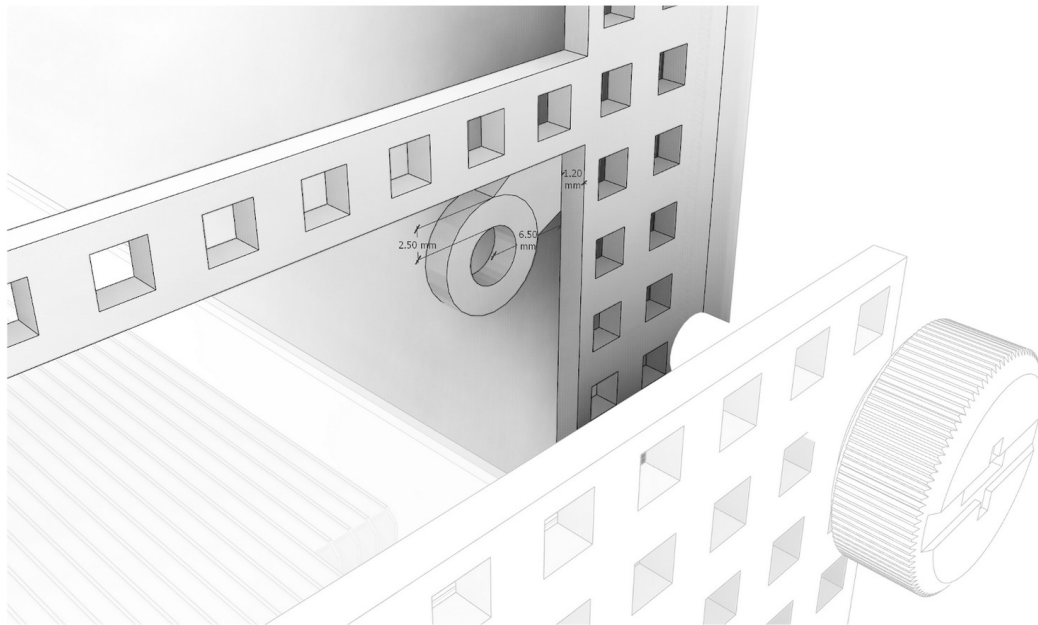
Node Retention Mechanism Layout and Measurements
